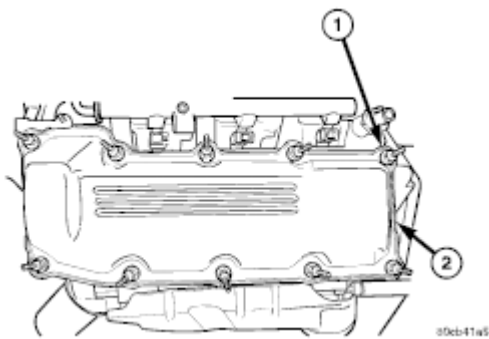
Identifying Cylinder Head Cover And Cylinder Head Cover Mounting Bolt
